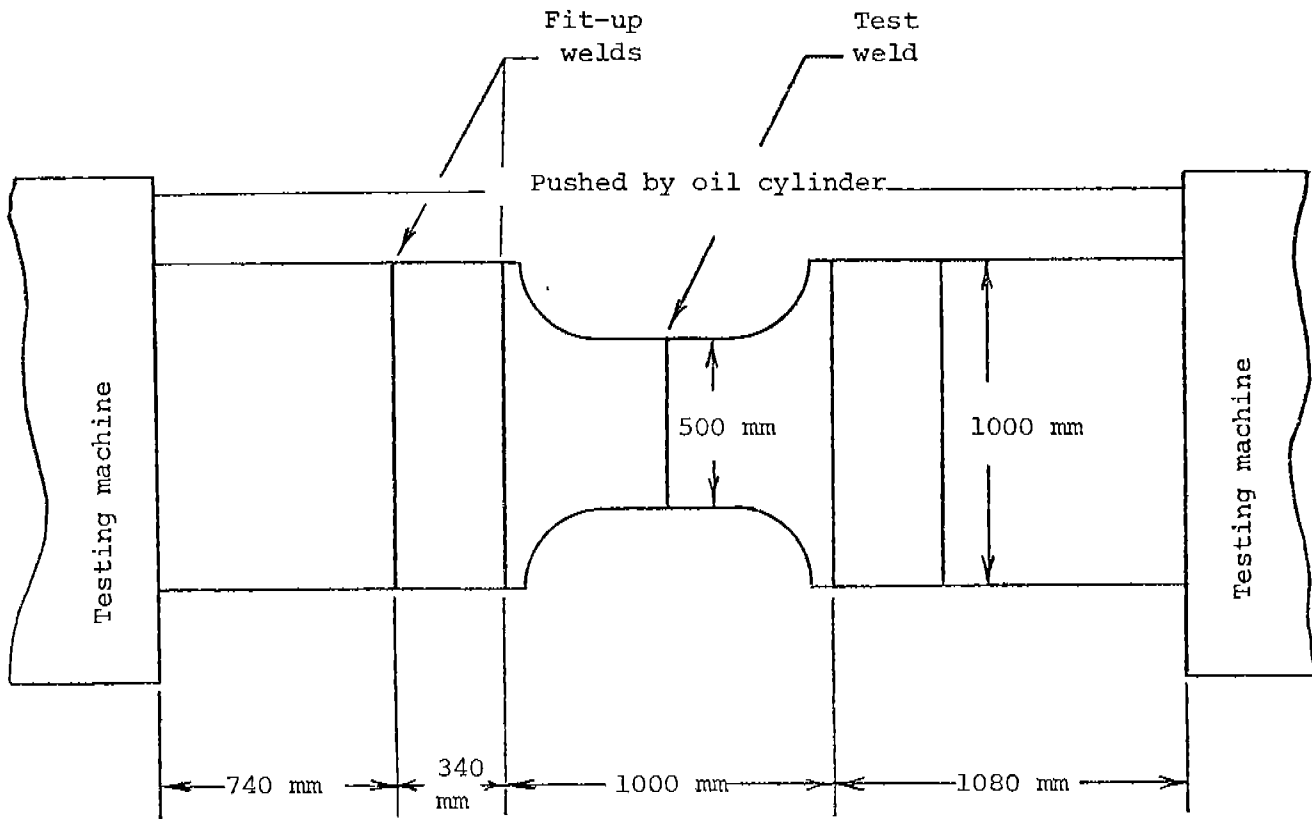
TENSILE-RESTRAINT CRACKING TEST SPECIMEN
